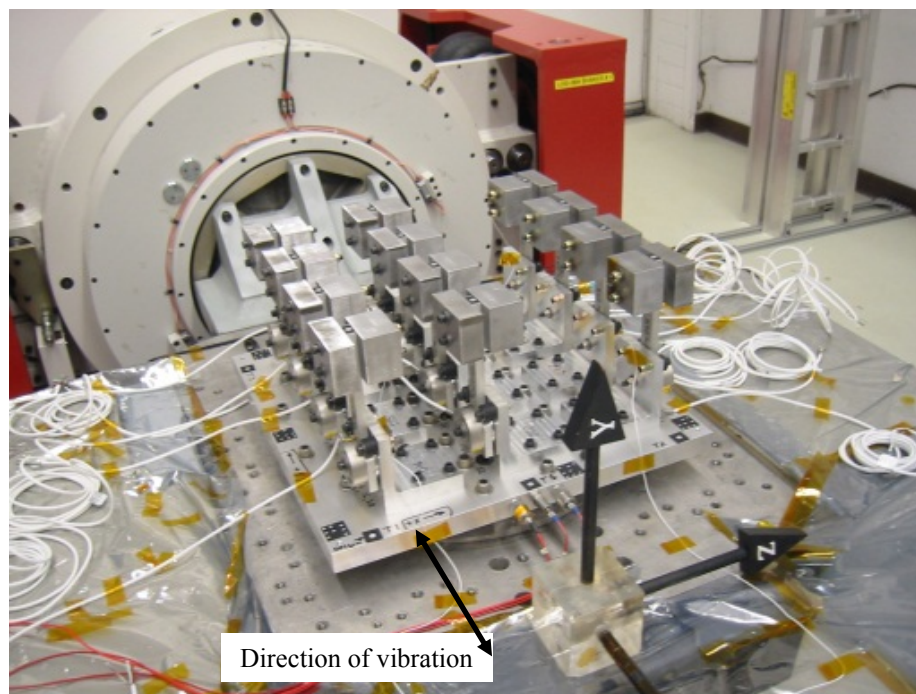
Typical test configuration showing twelve dynamic assemblies attached to the vibration fixture which is itself attached to the shaker head.
